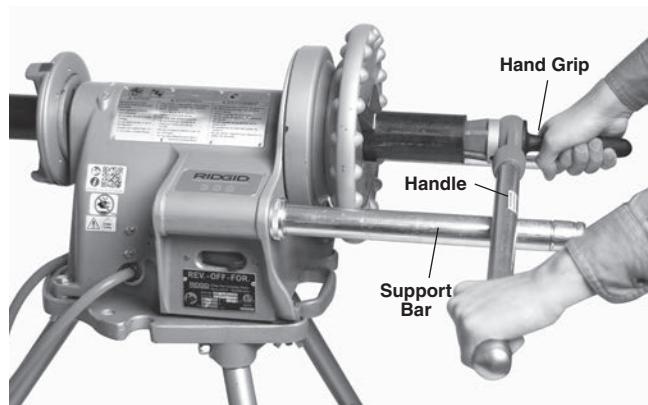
Reaming Pipe with Hand Reamer, (Keep reamer handle in contact with support bar)
